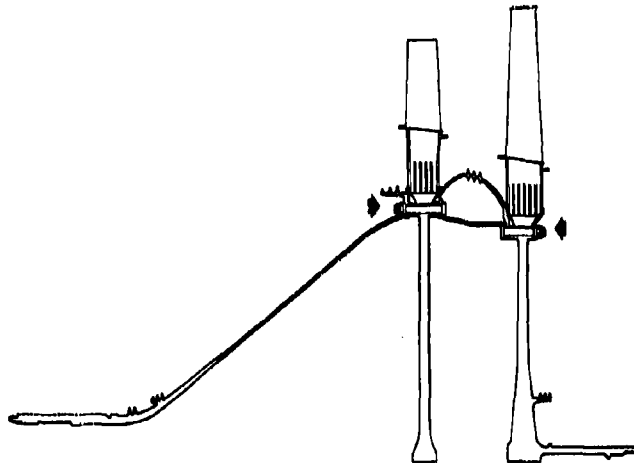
MAINTAINABILITY - ROTOR ASSEMBLY - DISASSEMBLY. The rotor can be assembled or disassembled from the front or rear. The heat shield/spacer assembly is a self contained semi-permanent assembly which retains the tapered dowels during handling and assembly and disassembly. There is easy access to all nuts and complete interchangeability of parts is assured. There is no requirement for any hand work at assembly other than standard self locking nut torquing.
